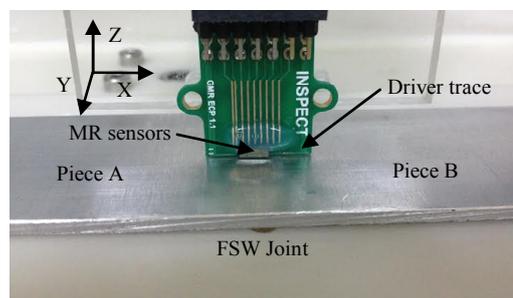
Eddy current testing probe prototype while testing a FSW joint.
